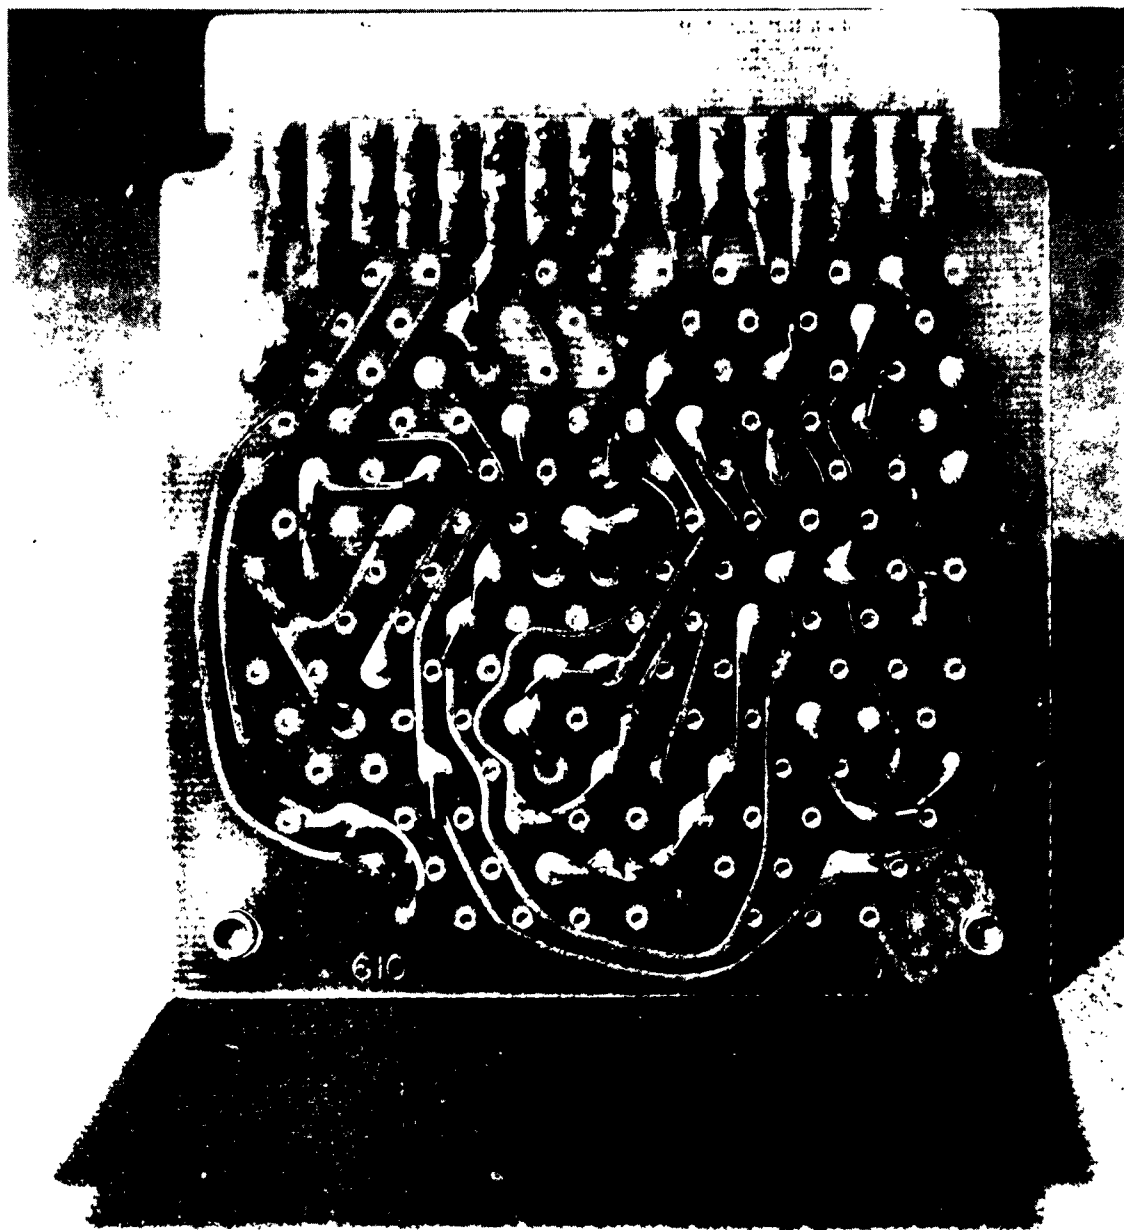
TELEPHONE SWITCH GEAR SUBASSEMBLY, 3" X 3"
